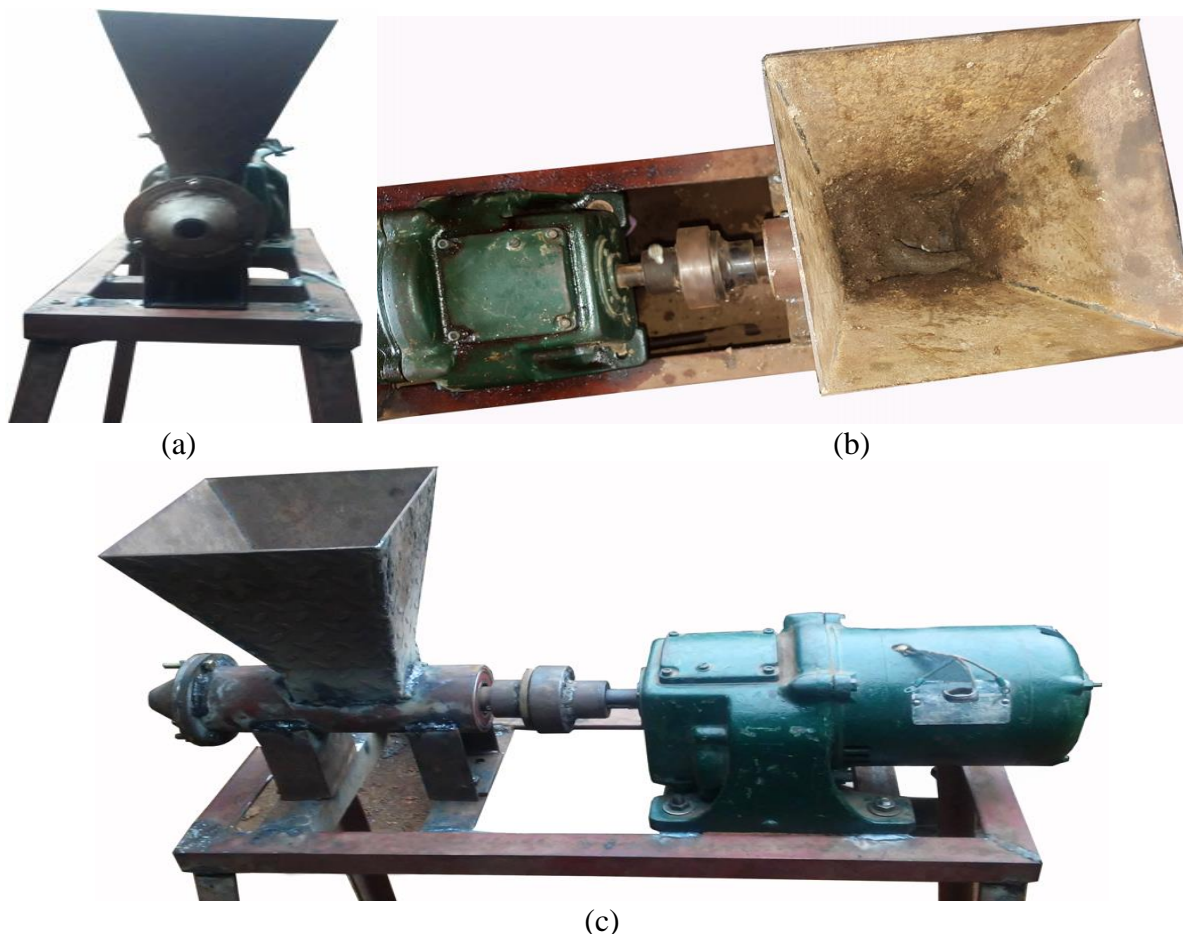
(a), (b) and (c): The fabricated screw press briquetting machine.
